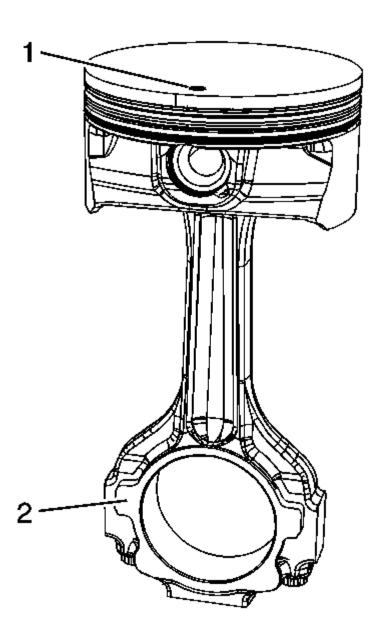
View of Mark On Top Of Piston & Connecting Rod Tab Courtesy of GENERAL MOTORS CORP.
